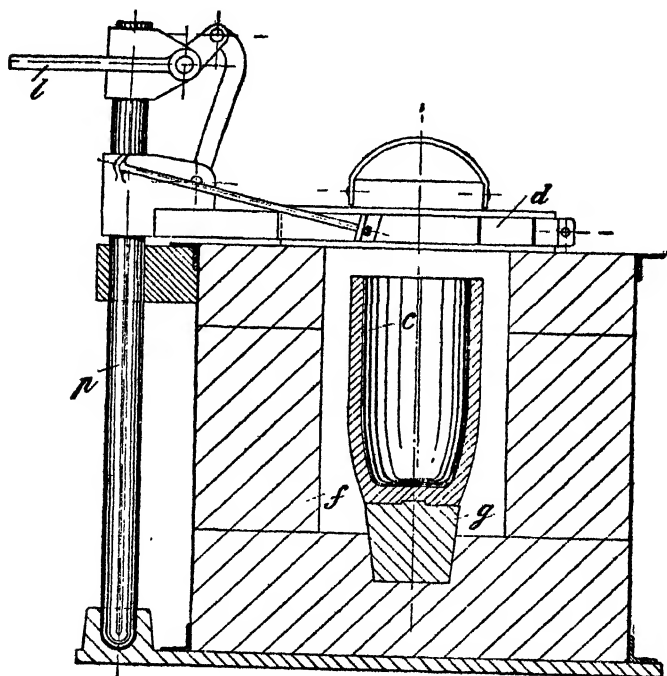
Alldays' crucible oil furnace, lift-out type.
